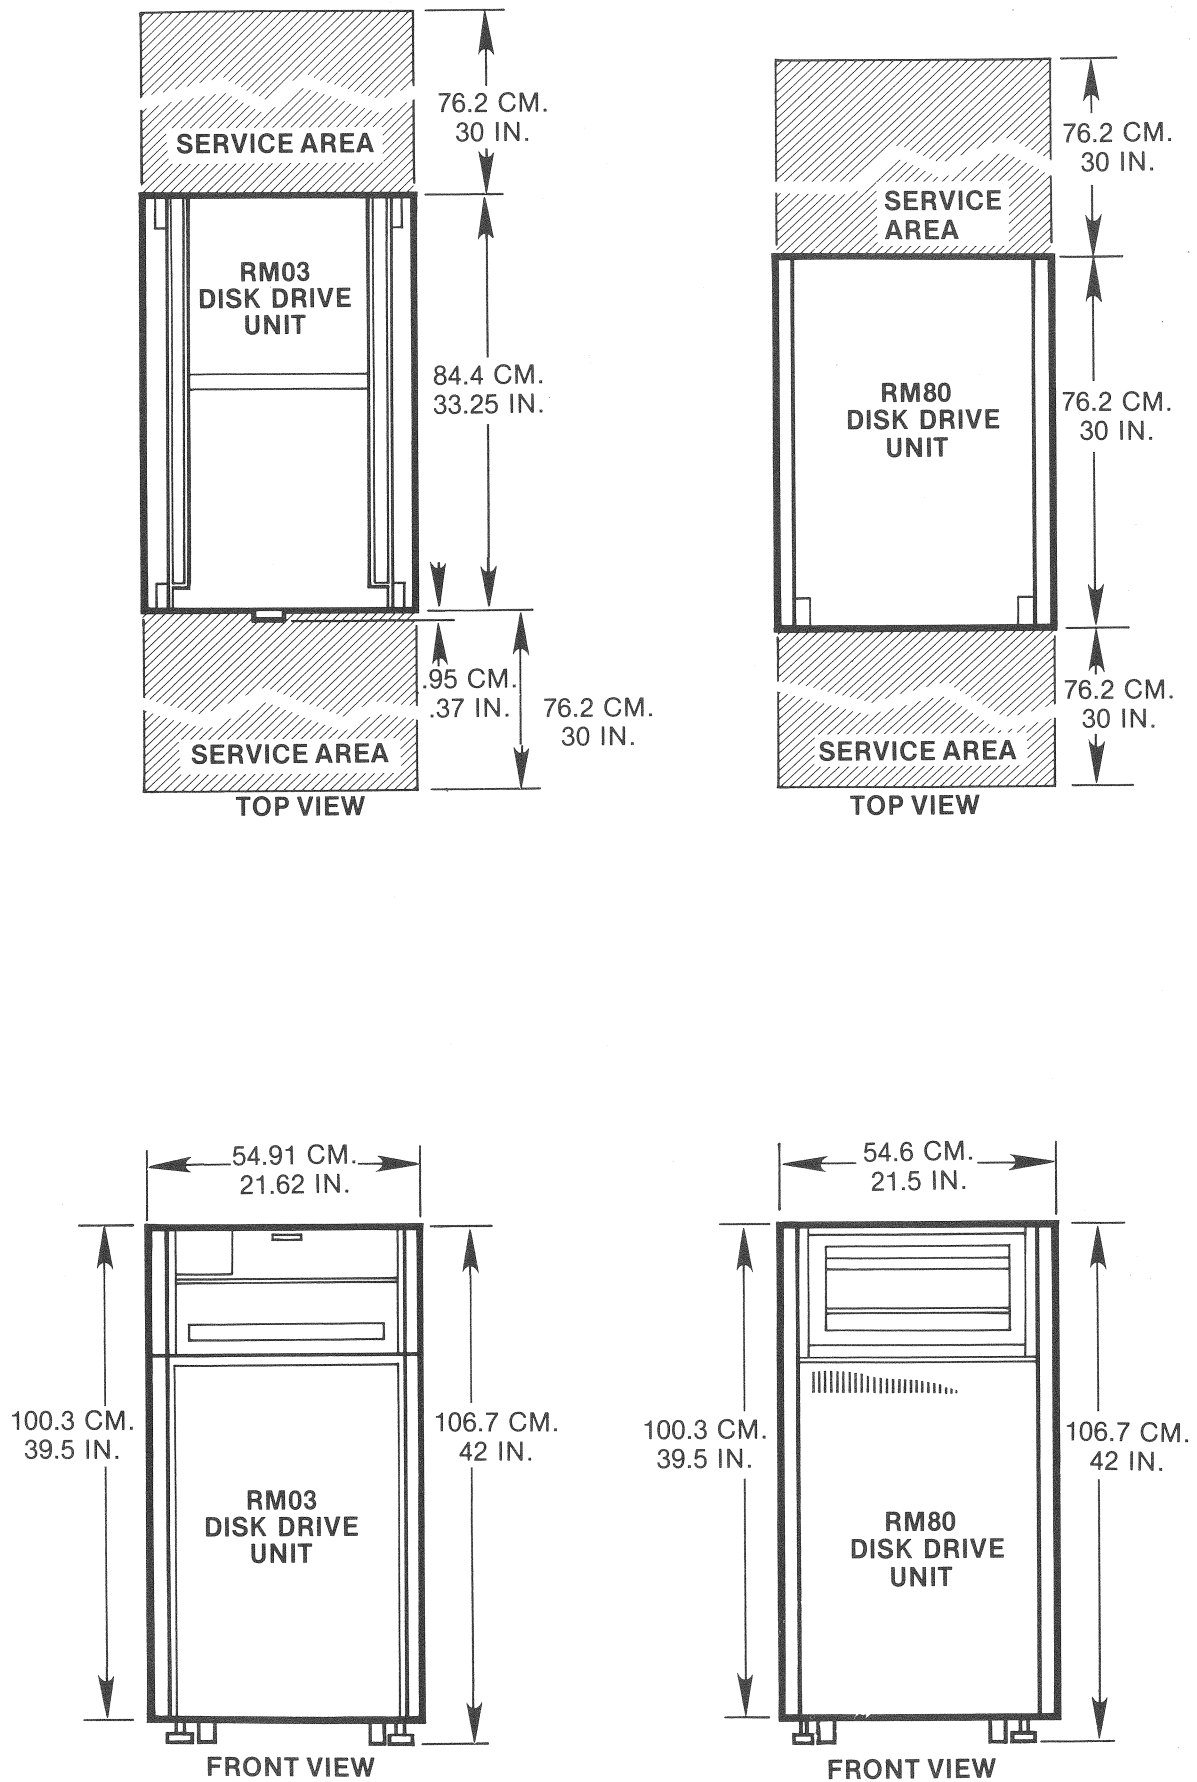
RM03 and RM80 Disk Drive Unit Dimensions
